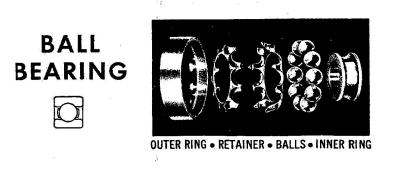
Ball Bearing-Outer Ring-Retainer-Balls-Inner Ring
